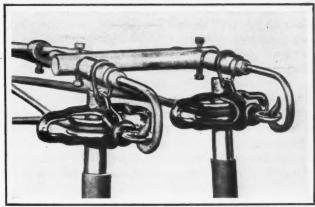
Stow Double-head Flexible-shaft Drive for Drill Chuck and Screwdriver Shown in Fig. 1
